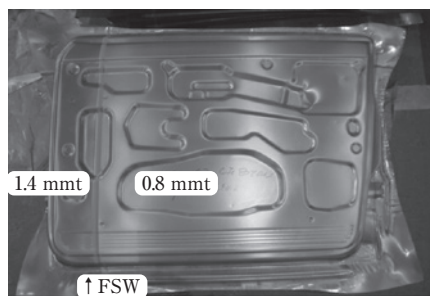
FSW tailored blanks for a prototype door inner of 5182-O-0.8/1.2 mm.
